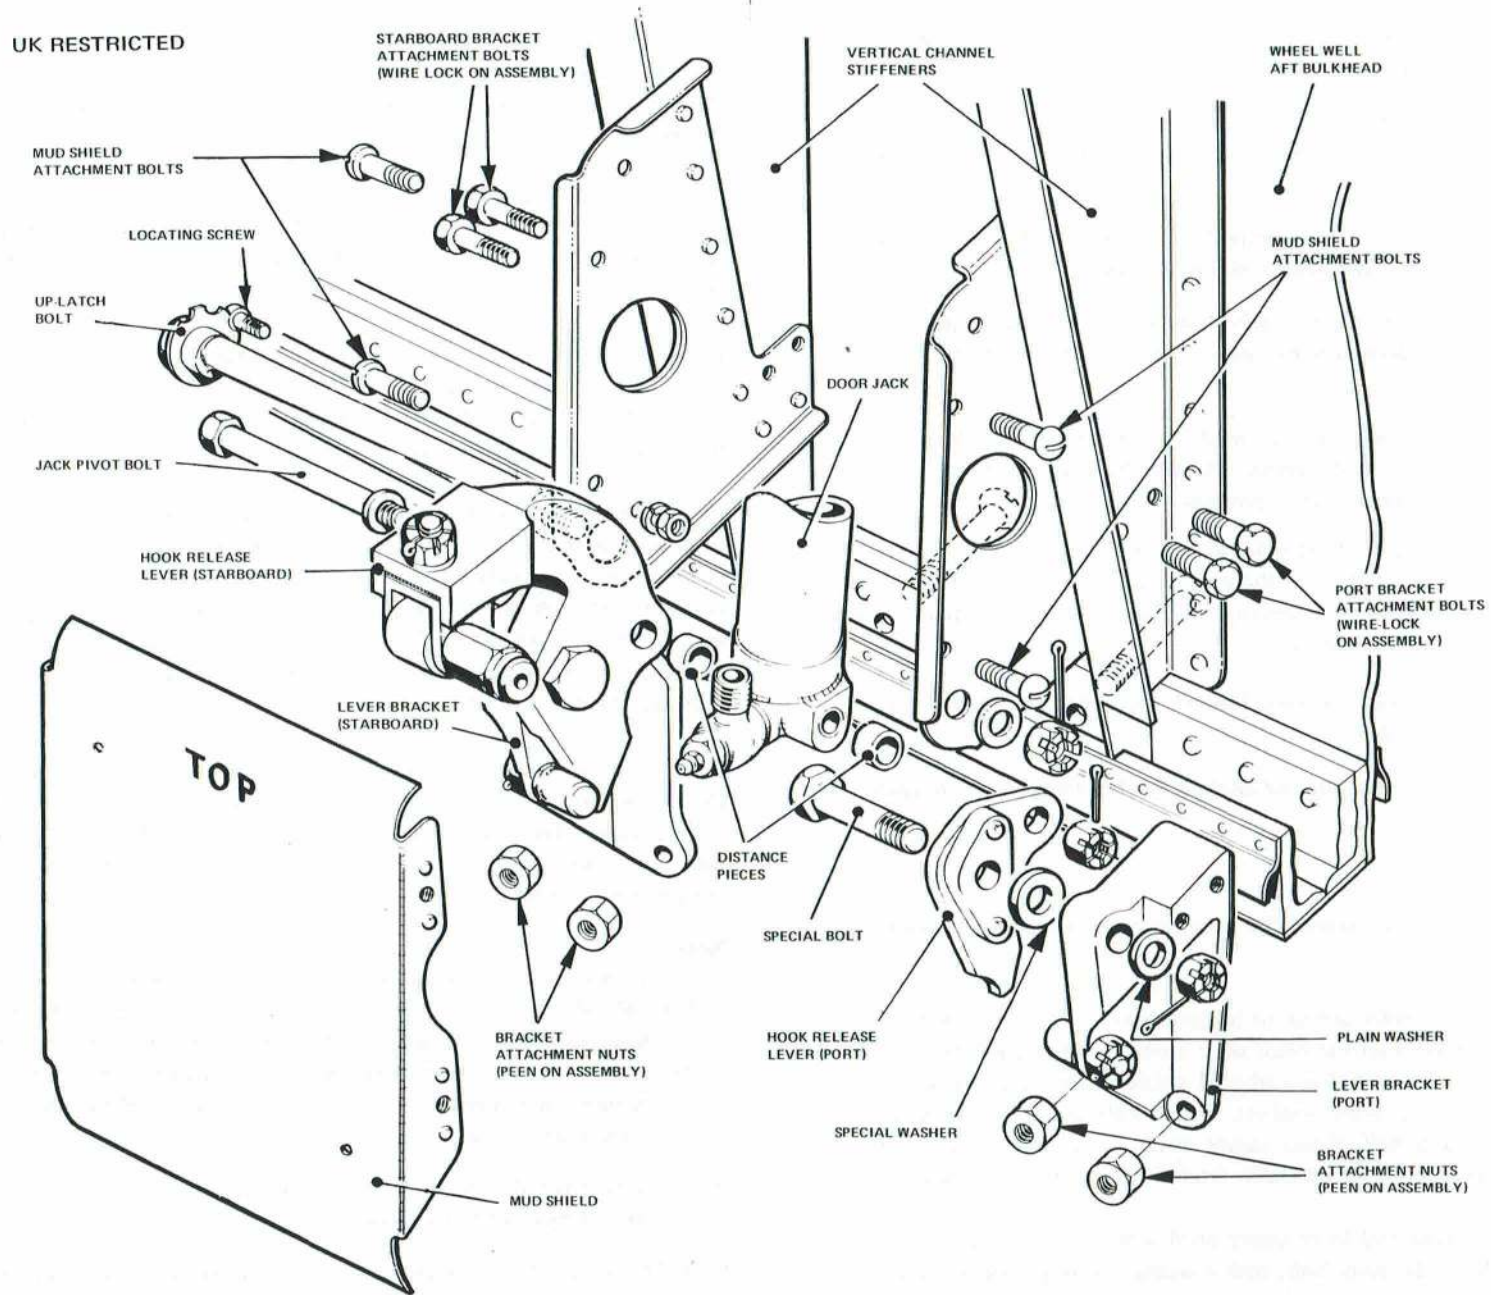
HOOK RELEASE MECHANISM & DOOR JACK REMOVAL
